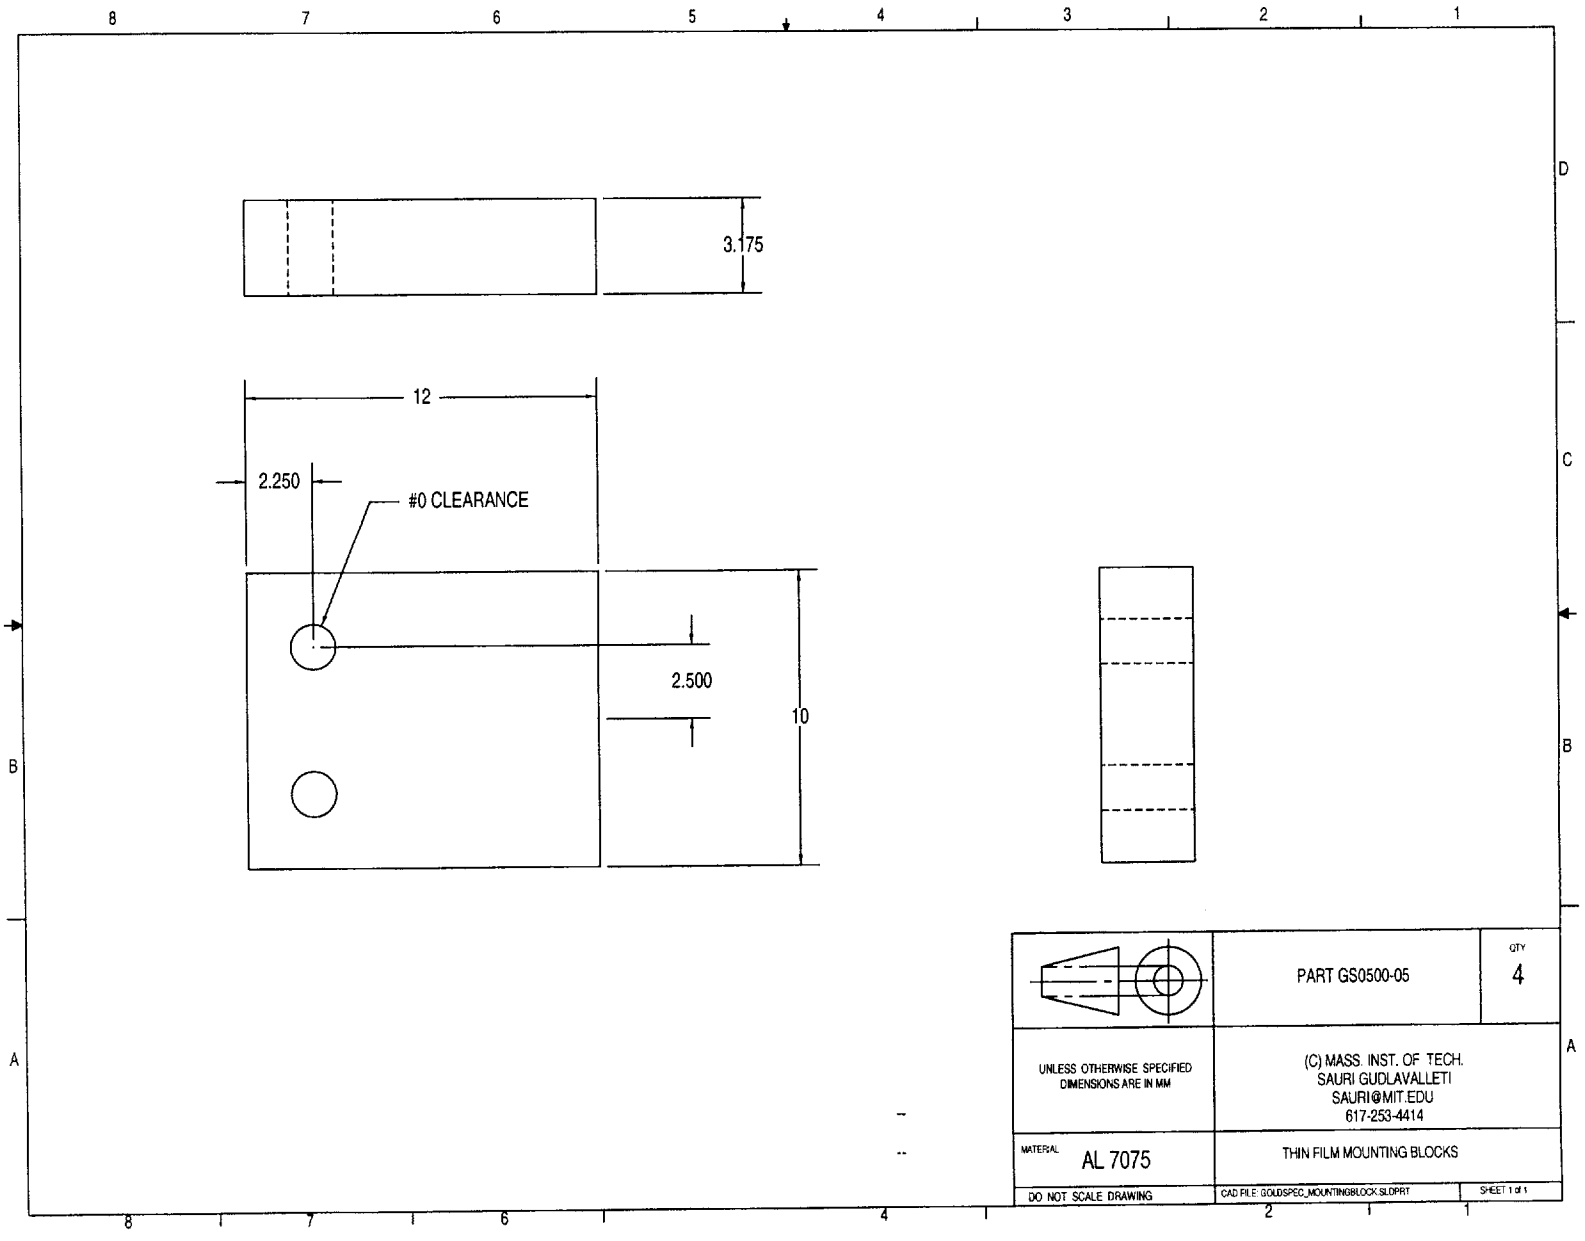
Part GS 0500-05. Mounting blocks for thin film specimens
